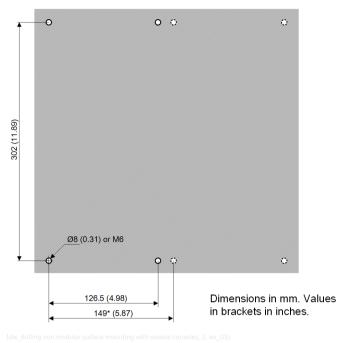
Drilling Pattern for a Non-Modular Surface-Mounted Device – Several Consoles
